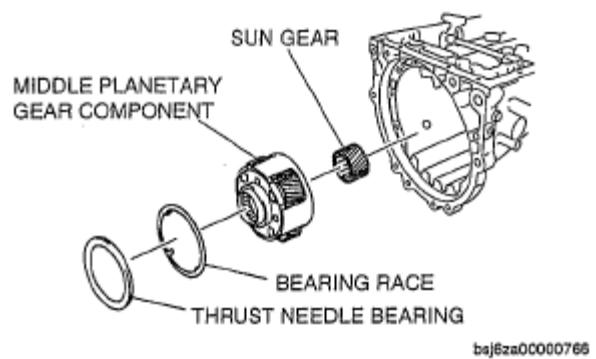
Identifying Middle Planetary Gear Component And Sun Gear
